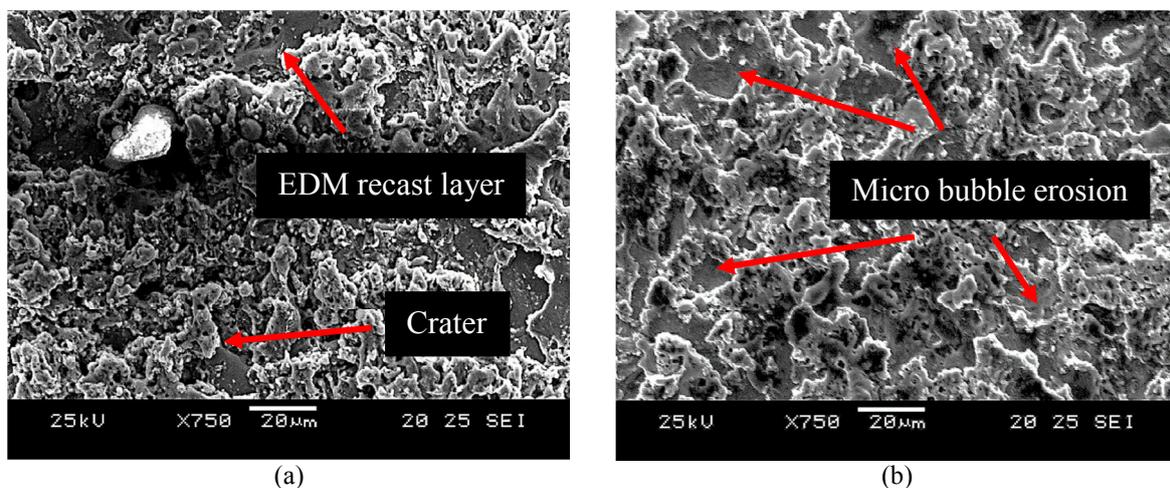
(a) EDM cut surface of SAE 304 stainless steel (b) surface after USM at P=100 kPa
